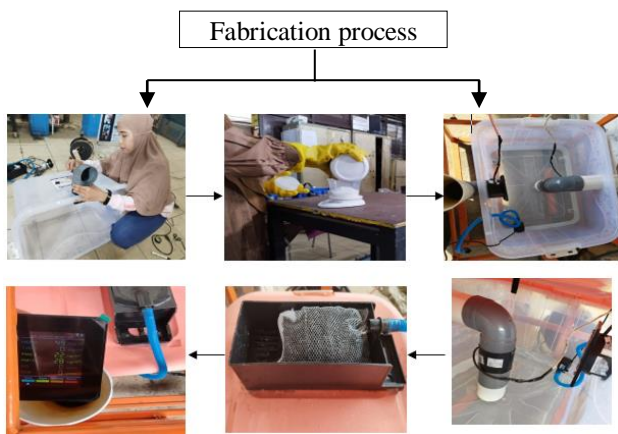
Welding smoke exhaust pipe installation process.
